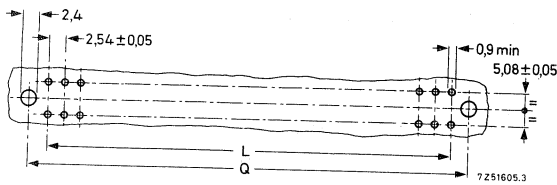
Hole pattern for board mounting of male parts; see Table 4 for dimensions L and Q.
